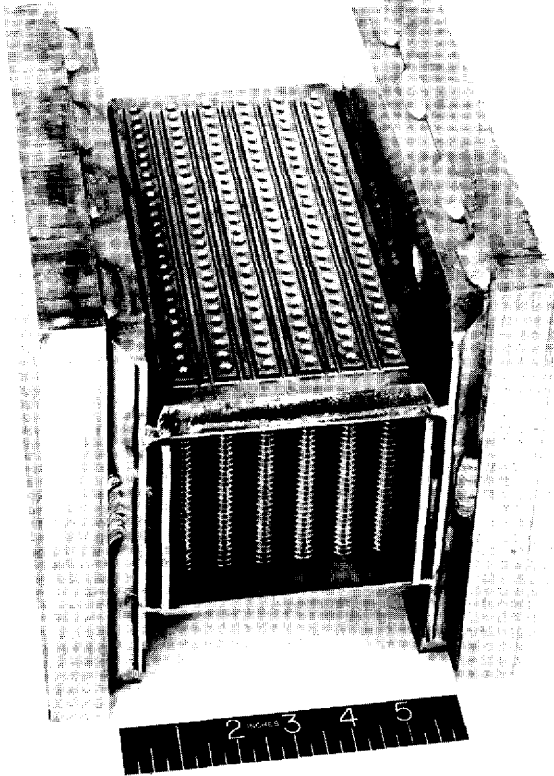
A 100-Weld Header Section of the Intermediate Heat Exchanger No. 2 Welded with the Semiautomatic Heliarc Welding Equipment. Note weld uniformity.
